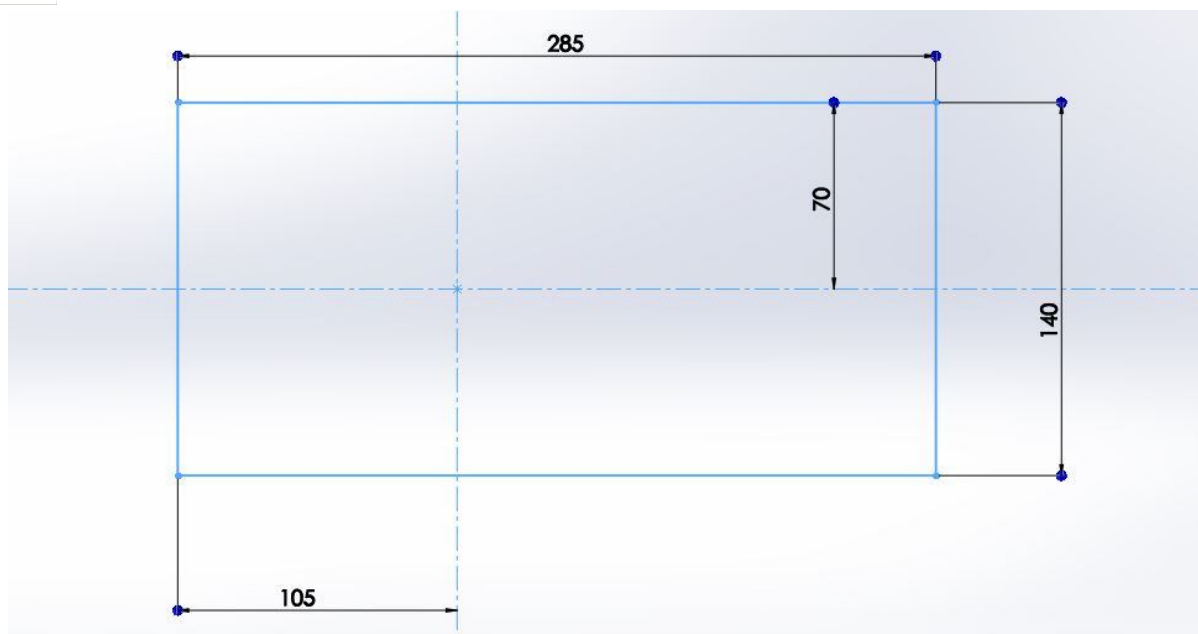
Basic Dimensions of Mirror showing spin axis which is offset from geometrical centre
